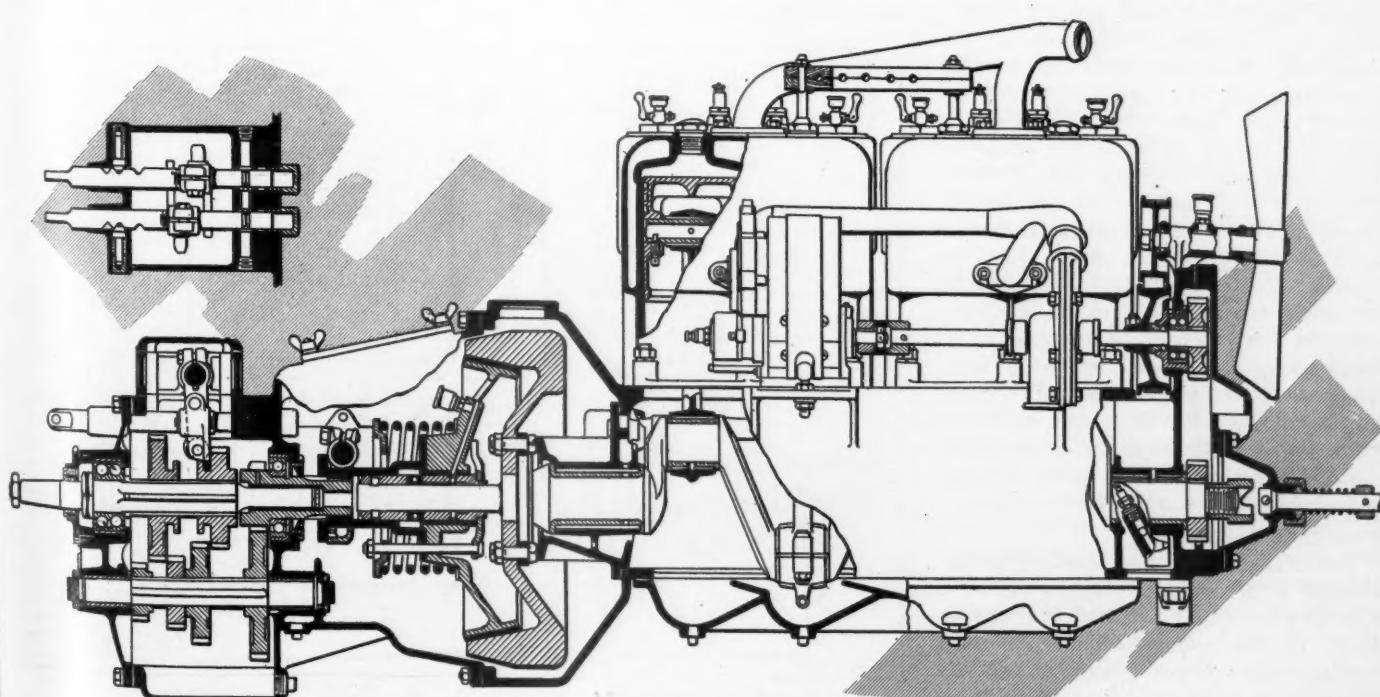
SIDE SECTIONAL VIEW OF A NORTHWAY UNIT POWER PLANT
